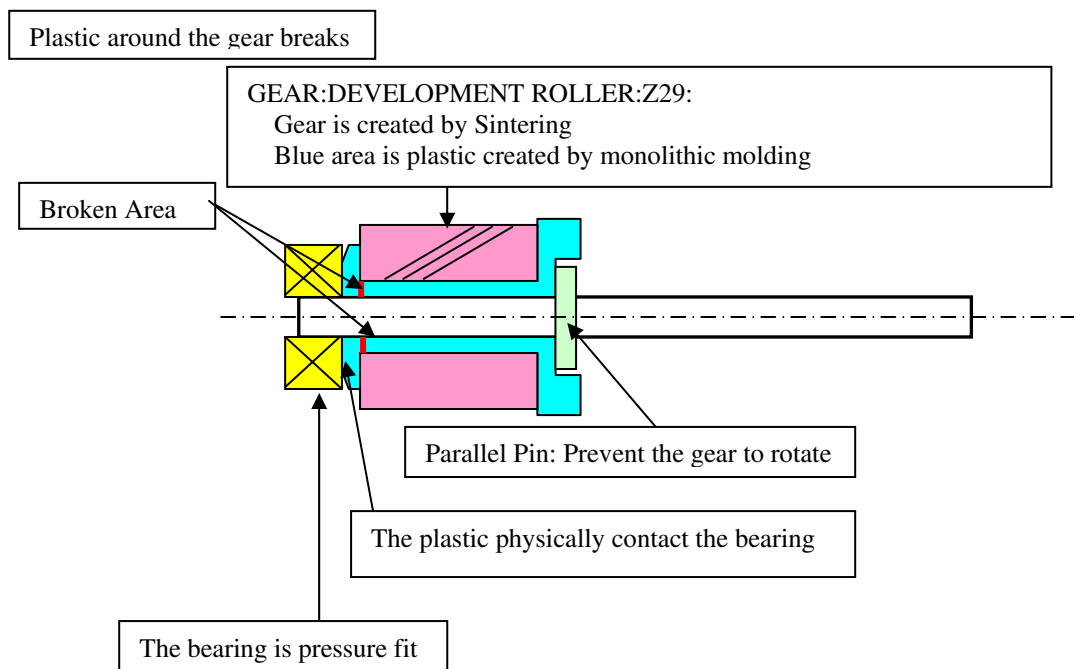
Composition of GEAR : DEVELOPMENT ROLLER Z29
